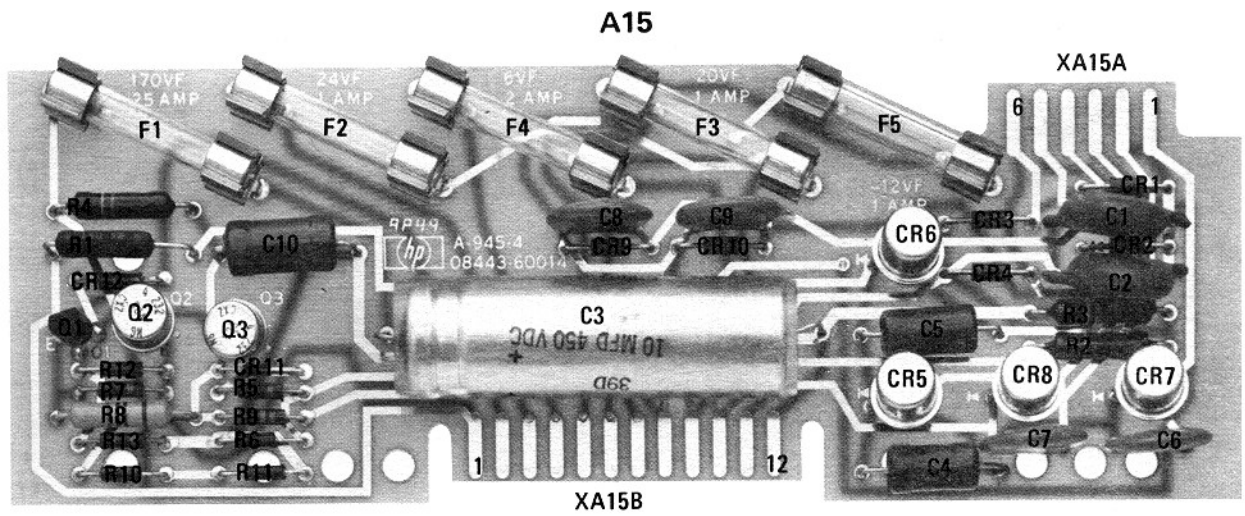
Rectifier Assembly A15 Parts Locations (CHANGE B)
